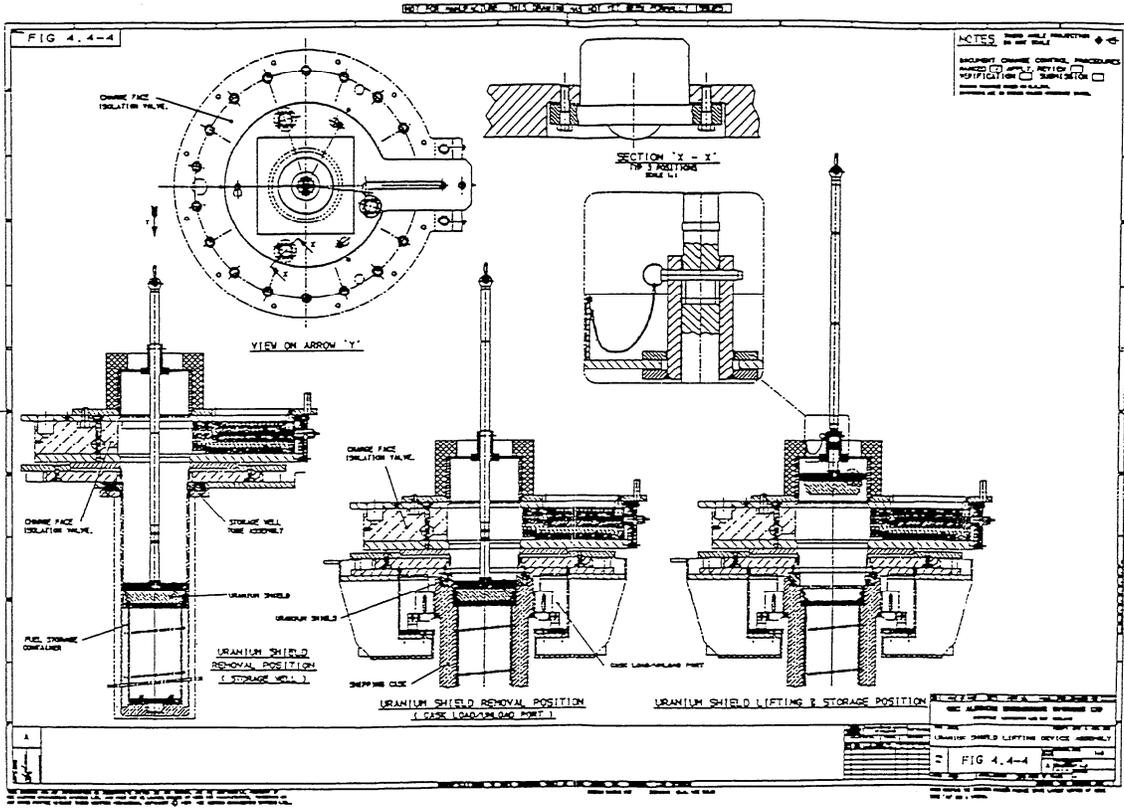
Uranium Shield Lifting Device Assembly.
